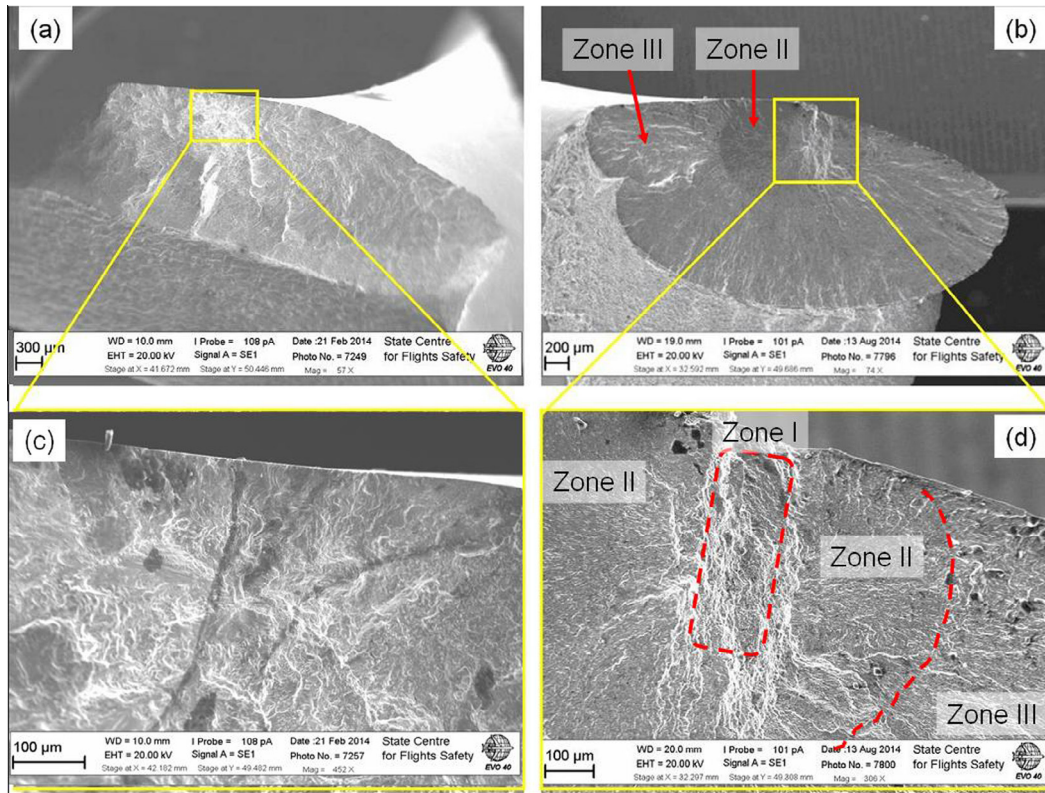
Fatigue failure surfaces with subsurface crack initiation: macroscopic view for (a) forged and (b) extruded Ti-alloy, and zoomed views of the crack initiation area for (c) forged and (d) extruded alloys.
